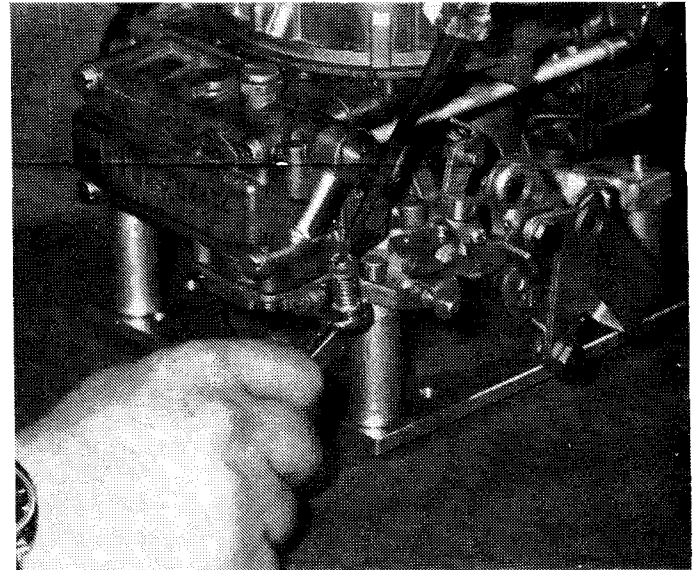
015 clearance is obtained by adjusting override spring screw as shown.
